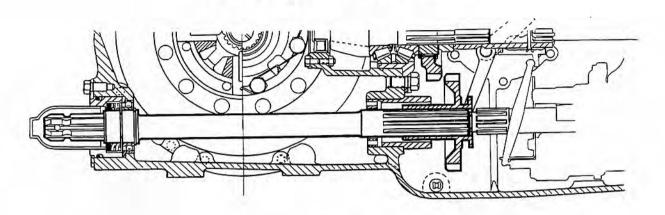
FIG. I SECTIONAL VIEW OF P.T.O. SHAFT
